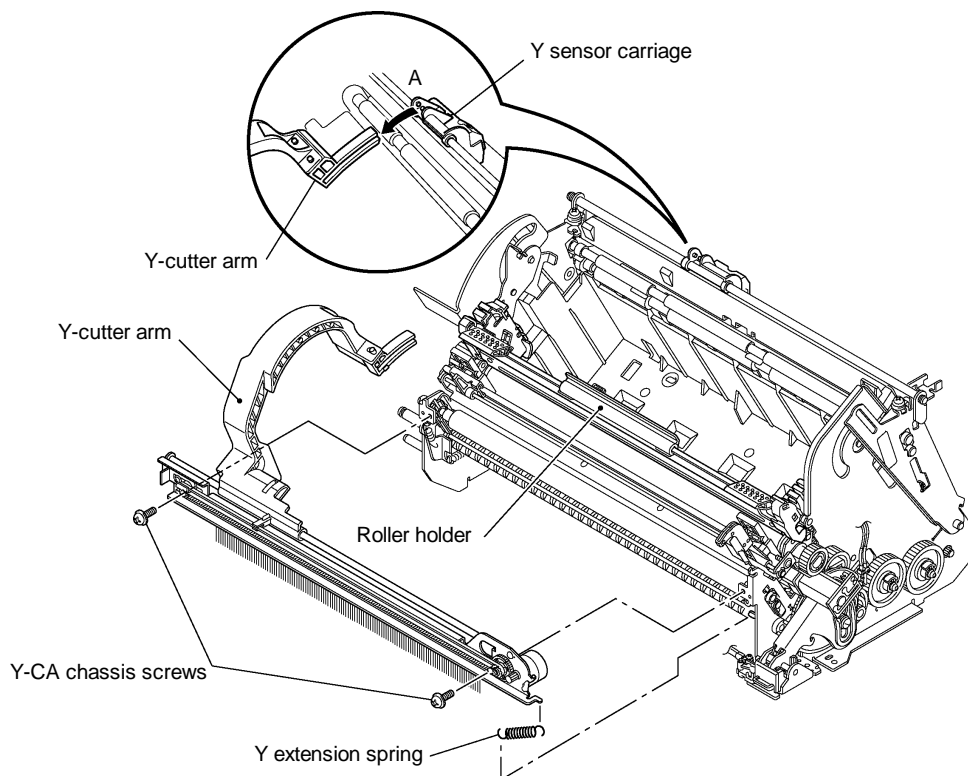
Removing the Y-CA Chassis Assy
